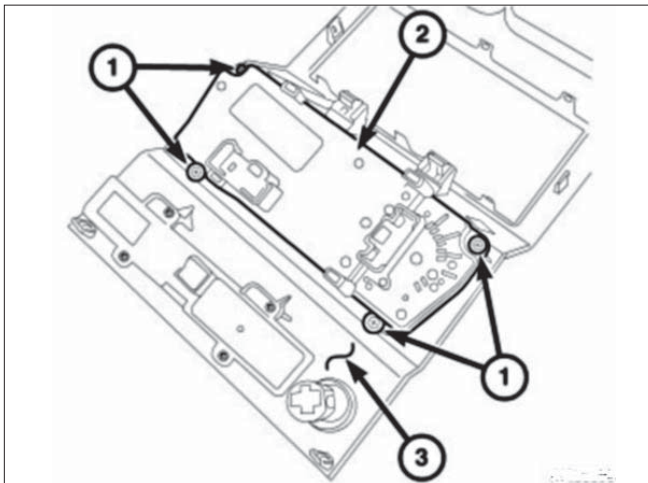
HVAC control module is built into control head. Remove bezel (3), then four retaining screws (1) and module (2) comes out.
